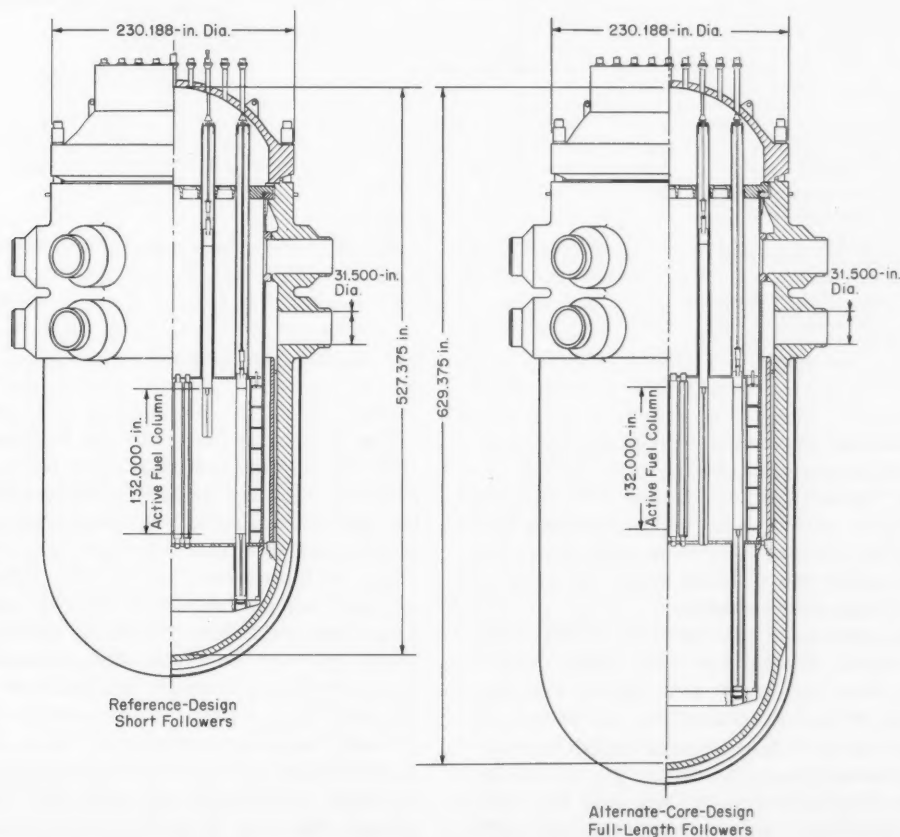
Reactor-vessel assembly for both the reference and alternate designs.<sup>1</sup>
